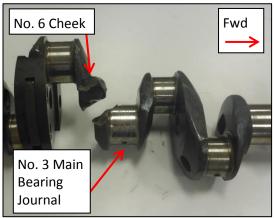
Crankshaft fracture between the number 3 main bearing journal and the number six cheek (web).
